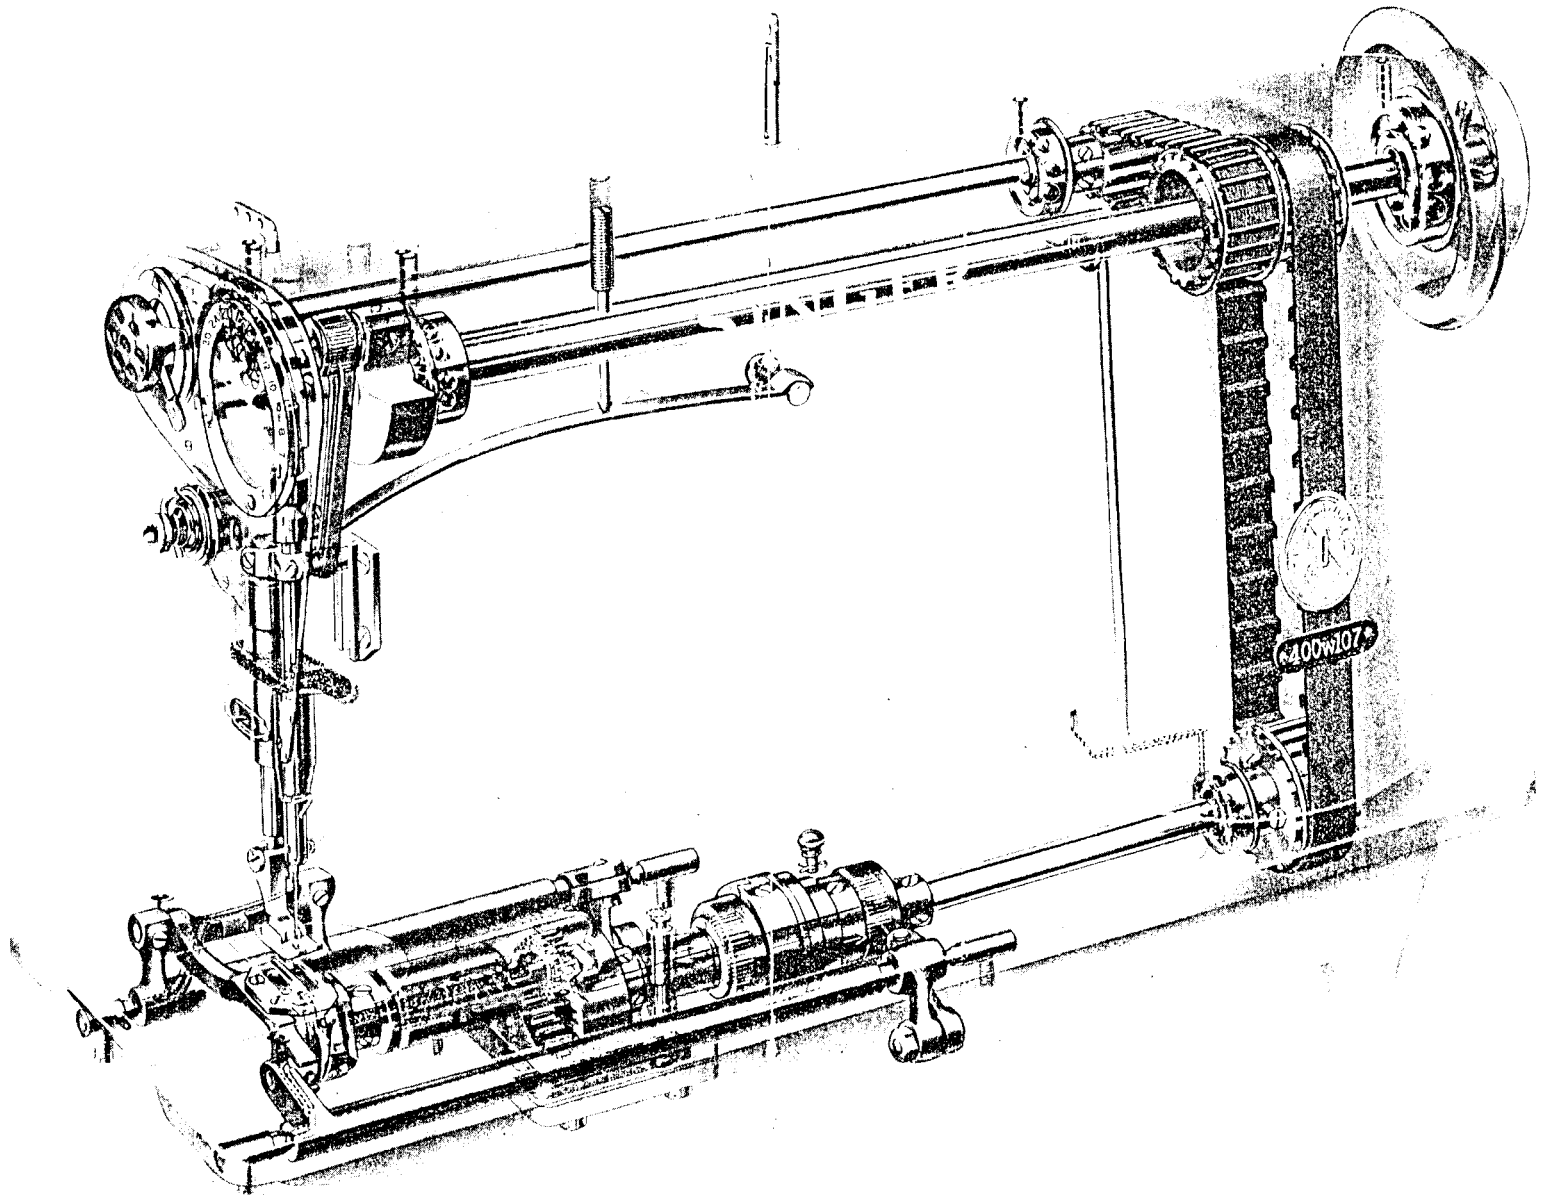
Stitch Regulator and Indicator on Machine 400w106
